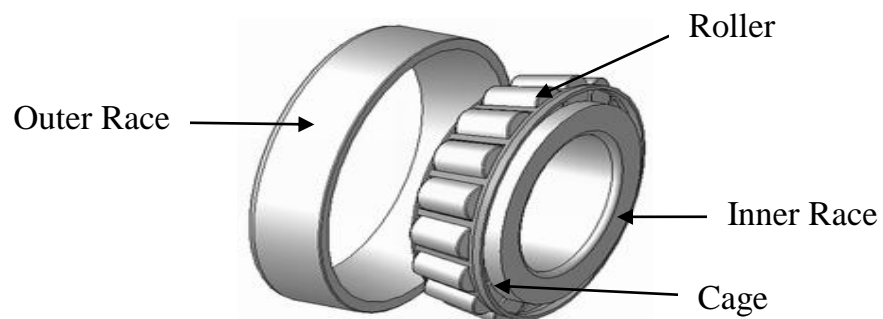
Taper roller bearing (Silberwolf, 2006)
